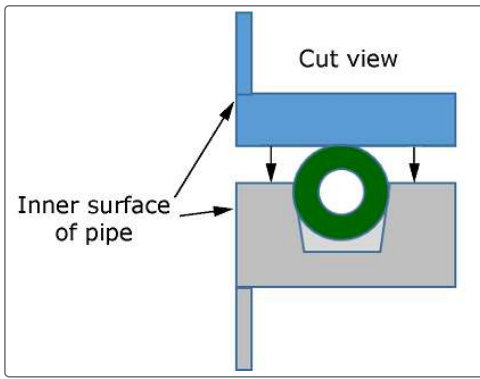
Axisymmetric model of the O-ring seal shown in swept view.
